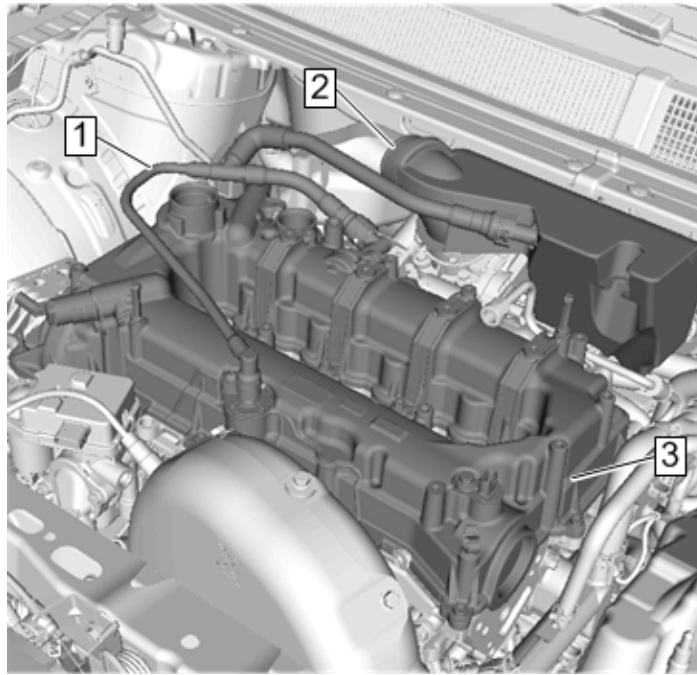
Camshaft Cover, Air Cleaner Outlet Duct And Positive Crankcase Ventilation Pipe
